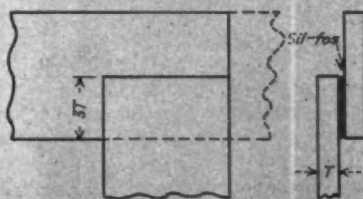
Typical brazed lap joint for right angle branch tap or joint
